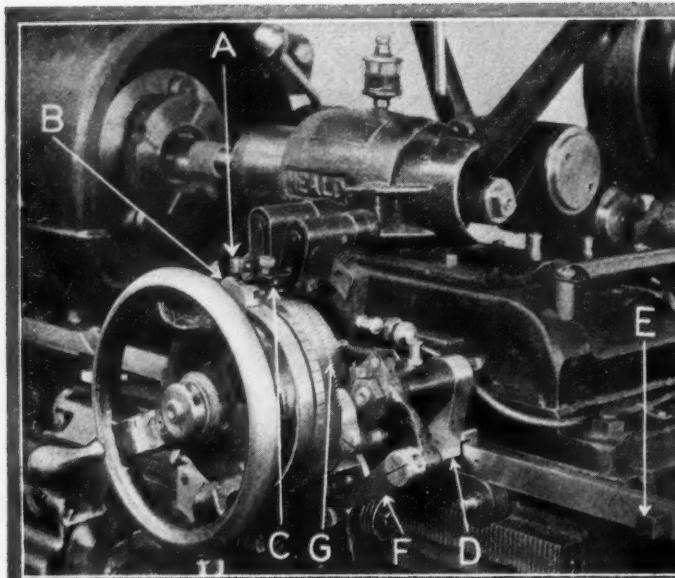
Right hand view of cross slide of new Heald Size-Matic automatic internal grinding machine
